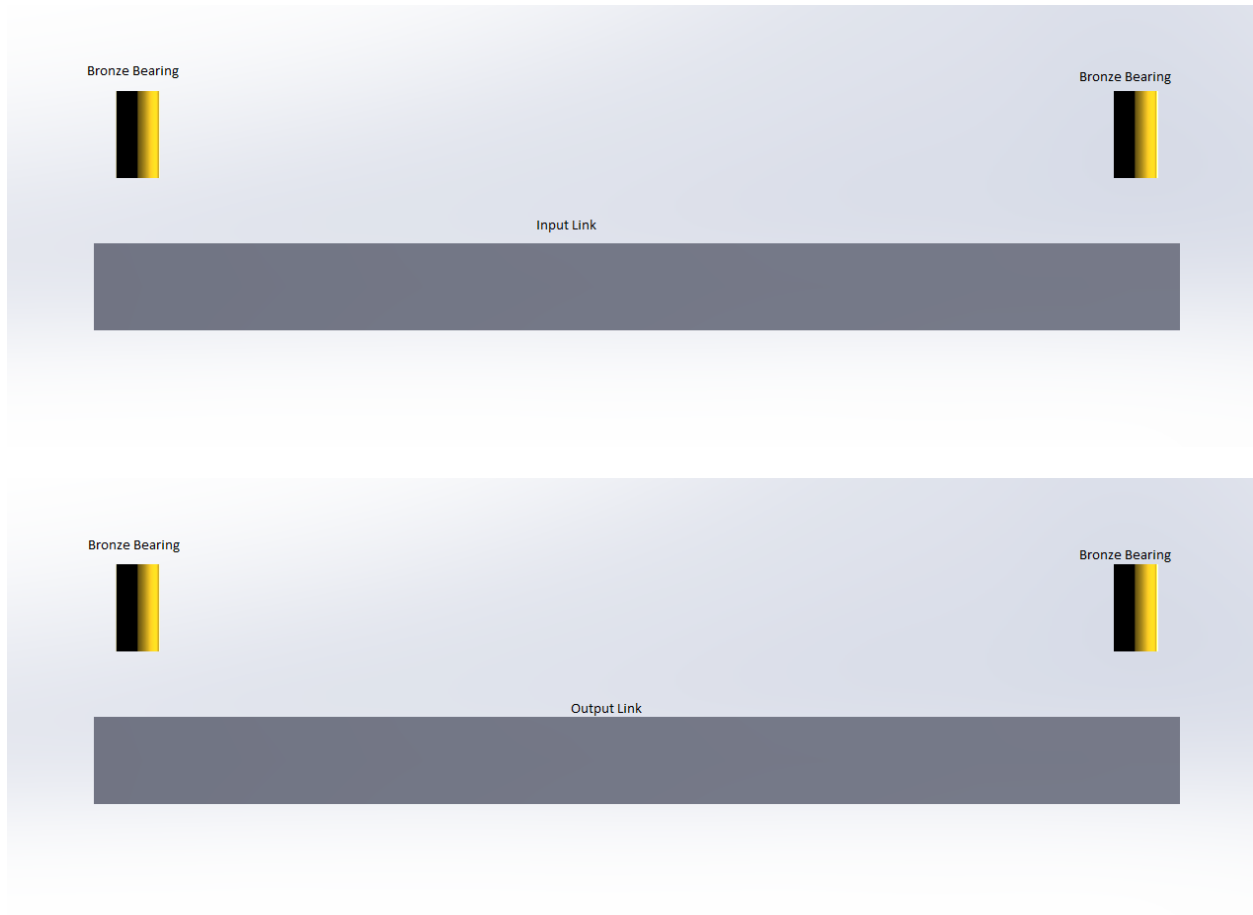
Step 1 Exploded View of Pressing fit bearings
